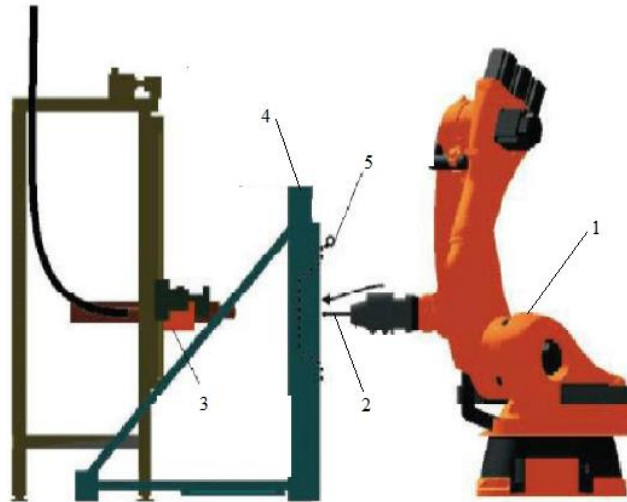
Forming with laser beam, [13]: 1 – robot with 6 axes; 2 – incremental forming tool; 3 – 3-axis laser beam positioning system; 4 – vertical table with clamping system; 5 – coolant circuit
